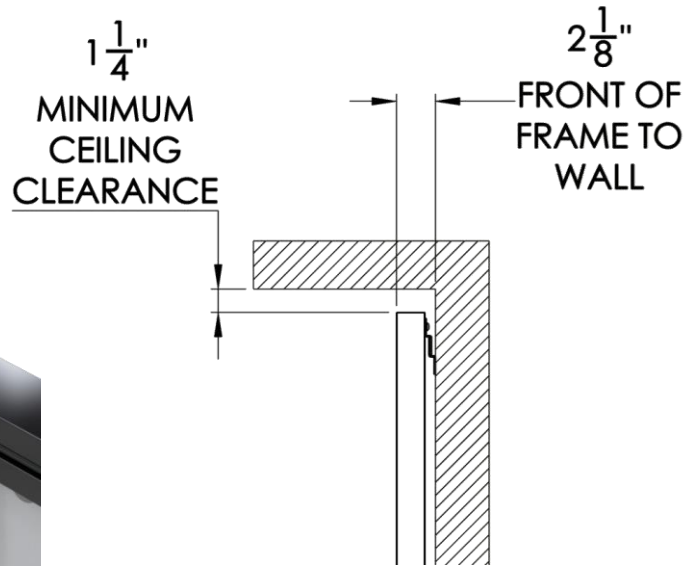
Side view profile drawing showcasing WSDQ frame minimum ceiling clearance dimension when equipped with EZ Mount G2.
